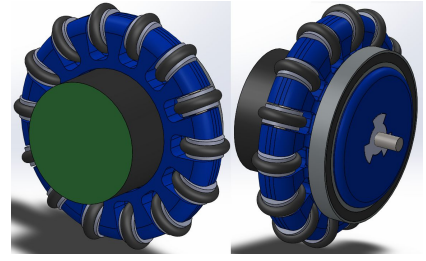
Wheel, motor and bearing design, with an outer diameter of 52.1 mm and a width of 27.5 mm.
